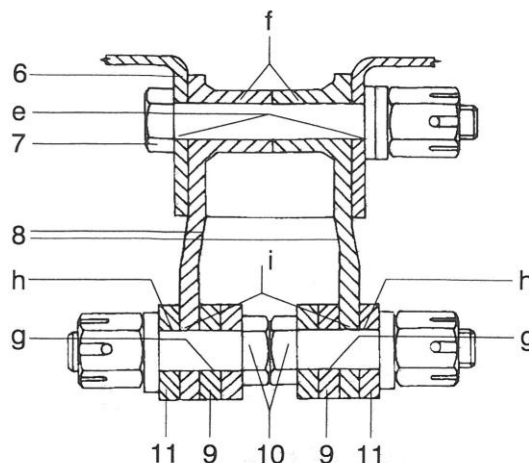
Dimensions, allowances and plays in trim tab control fitting
